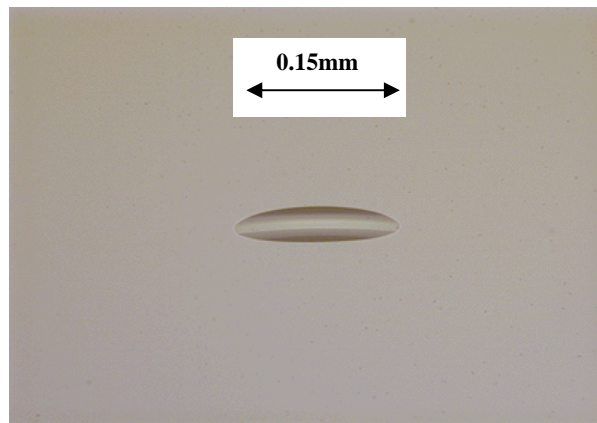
A typical dimple on the crystal surface, produced by micro-machining using a single-crystal diamond end mill bit. The dimple is smooth and crack-free. The size of the dimple is determined by the penetration depth during the cut. The ratios of the cut dimensions are: length/width/depth = 30/6/1
